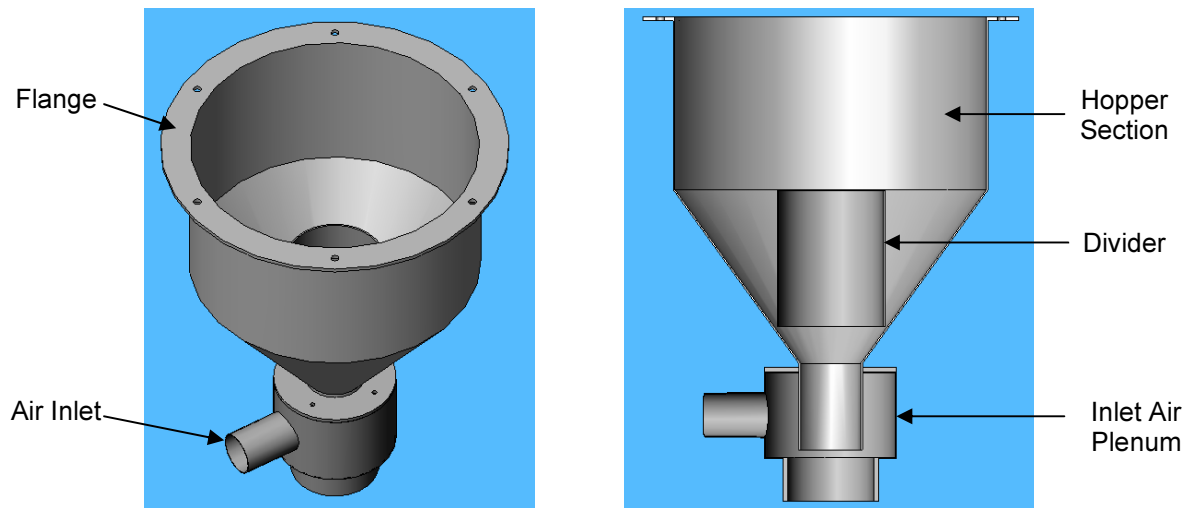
Solidworks isometric and section drawings of the single cell baghouse hopper assembly
